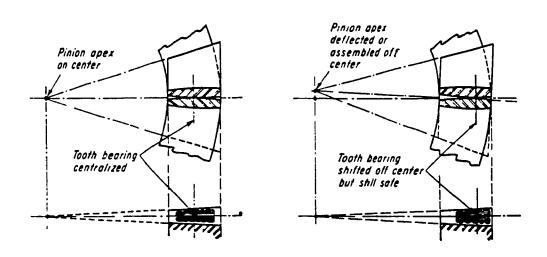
Tooth Curvature of Coniflex Gears [3]
